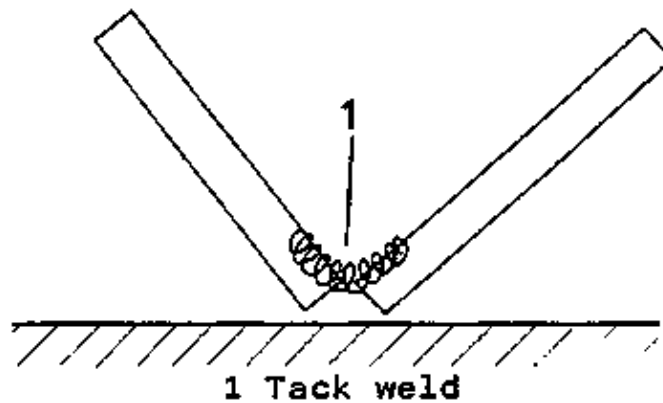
Position of the tack weld immediately at the plate edge
